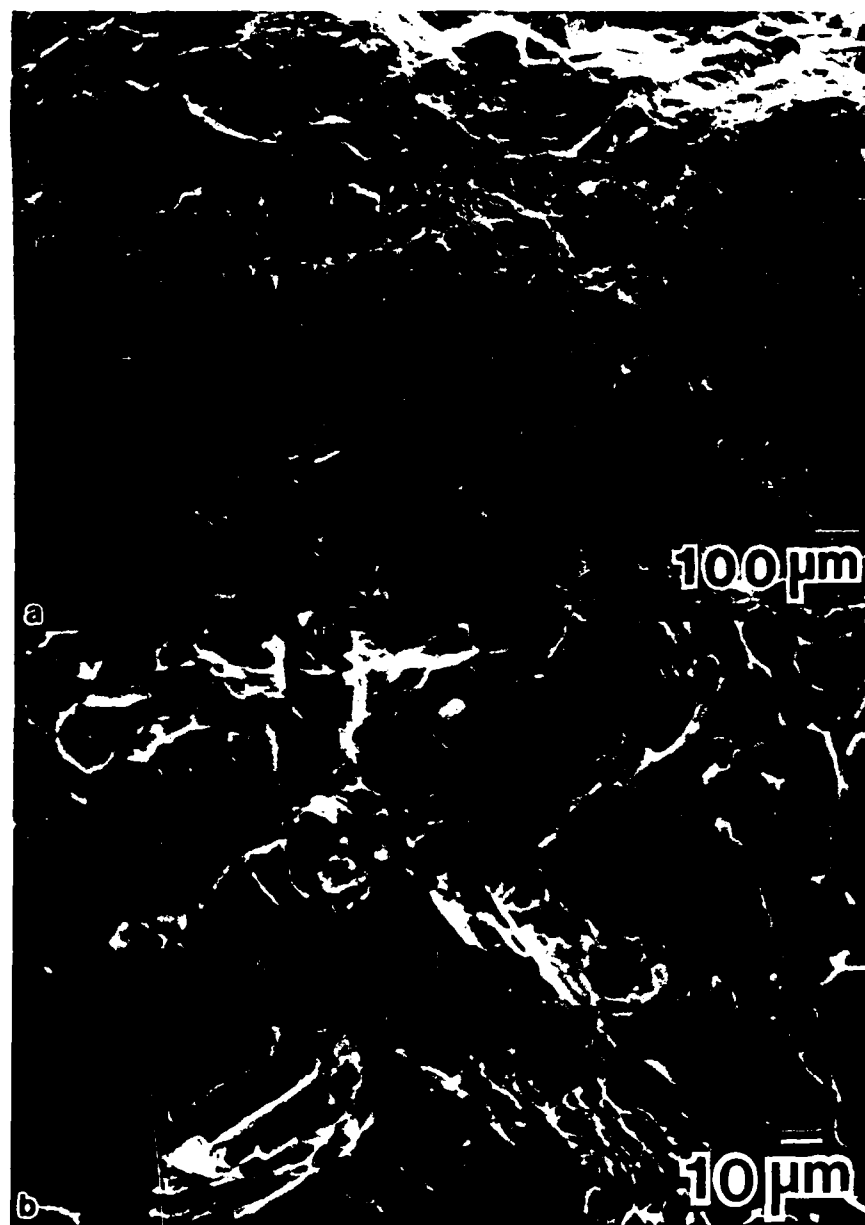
Fracture surface of specimen aged at 300°C for two hours. Testing temperature;
